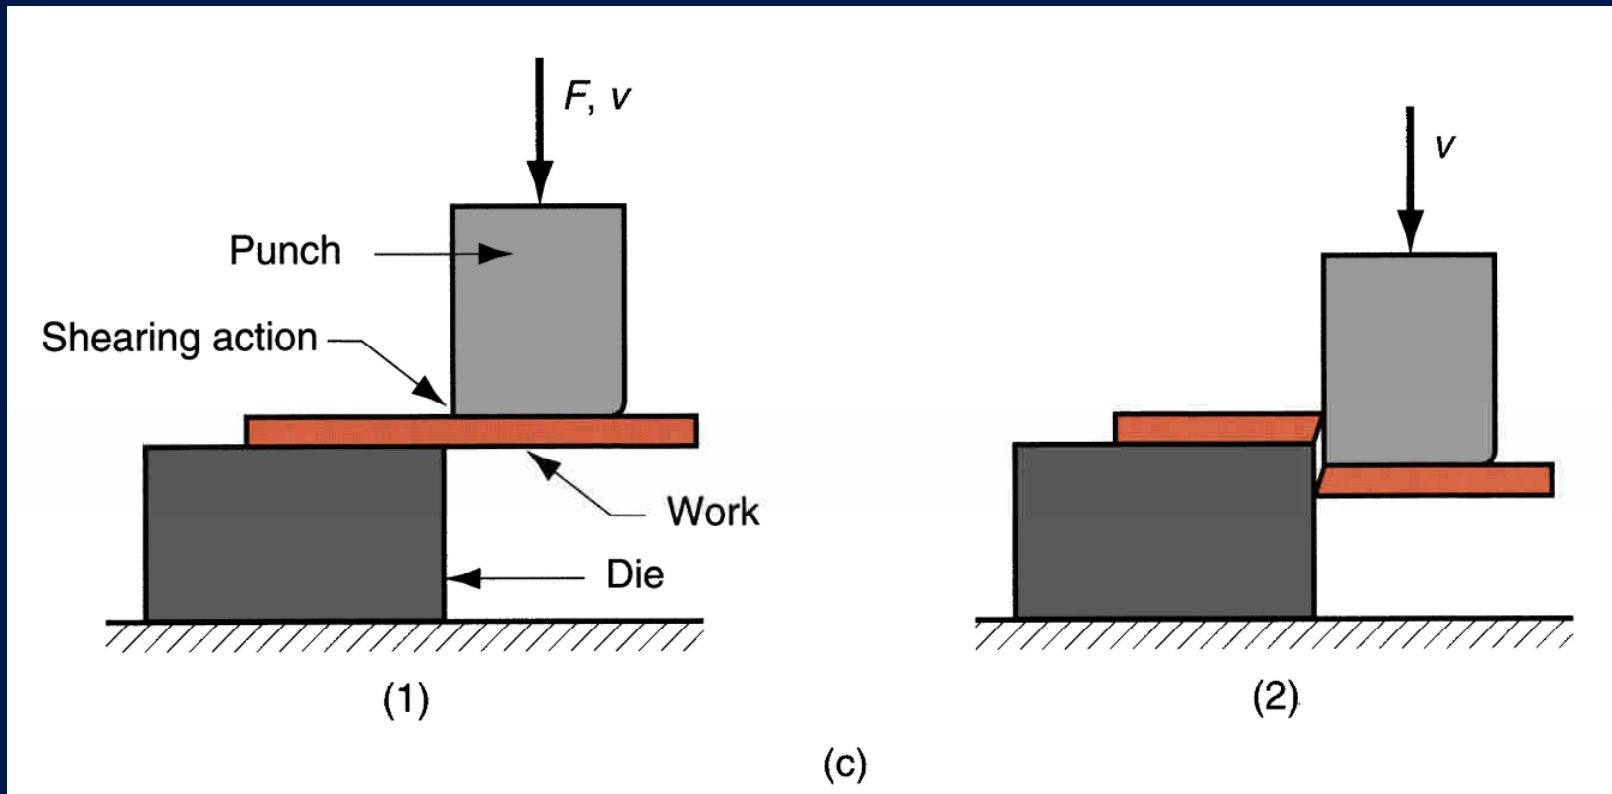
Basic sheet metalworking operations: (c) shearing
